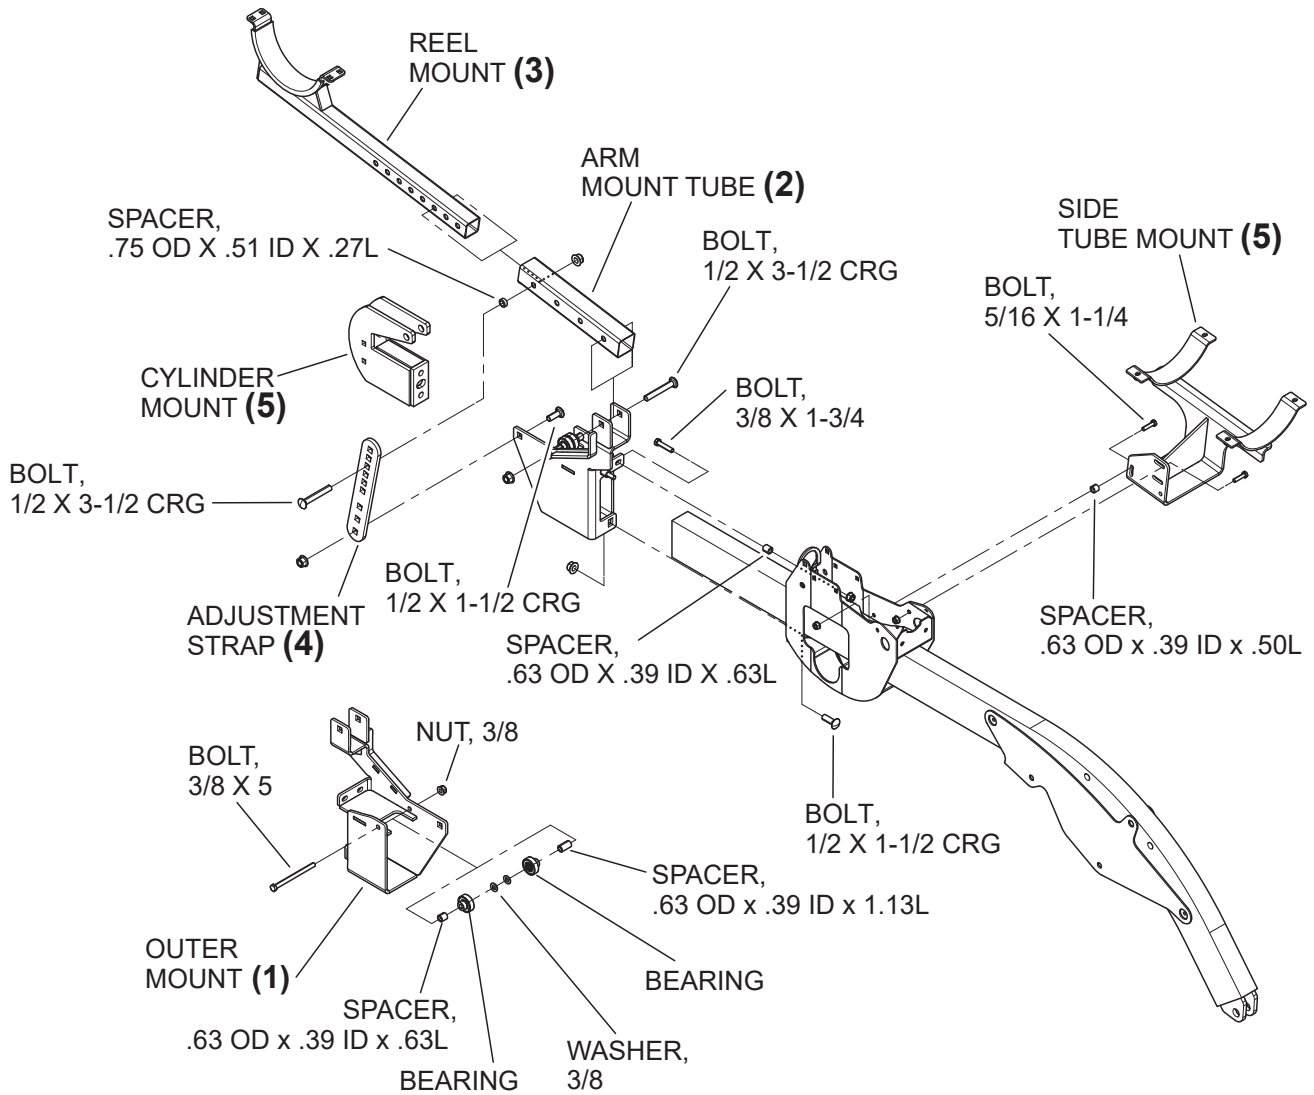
RH reel arm mount assembly (FD70 & CIH 2162 headers)
